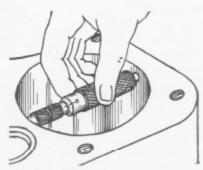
Measuring Finished Cylinder Bore with Inside Micrometer
